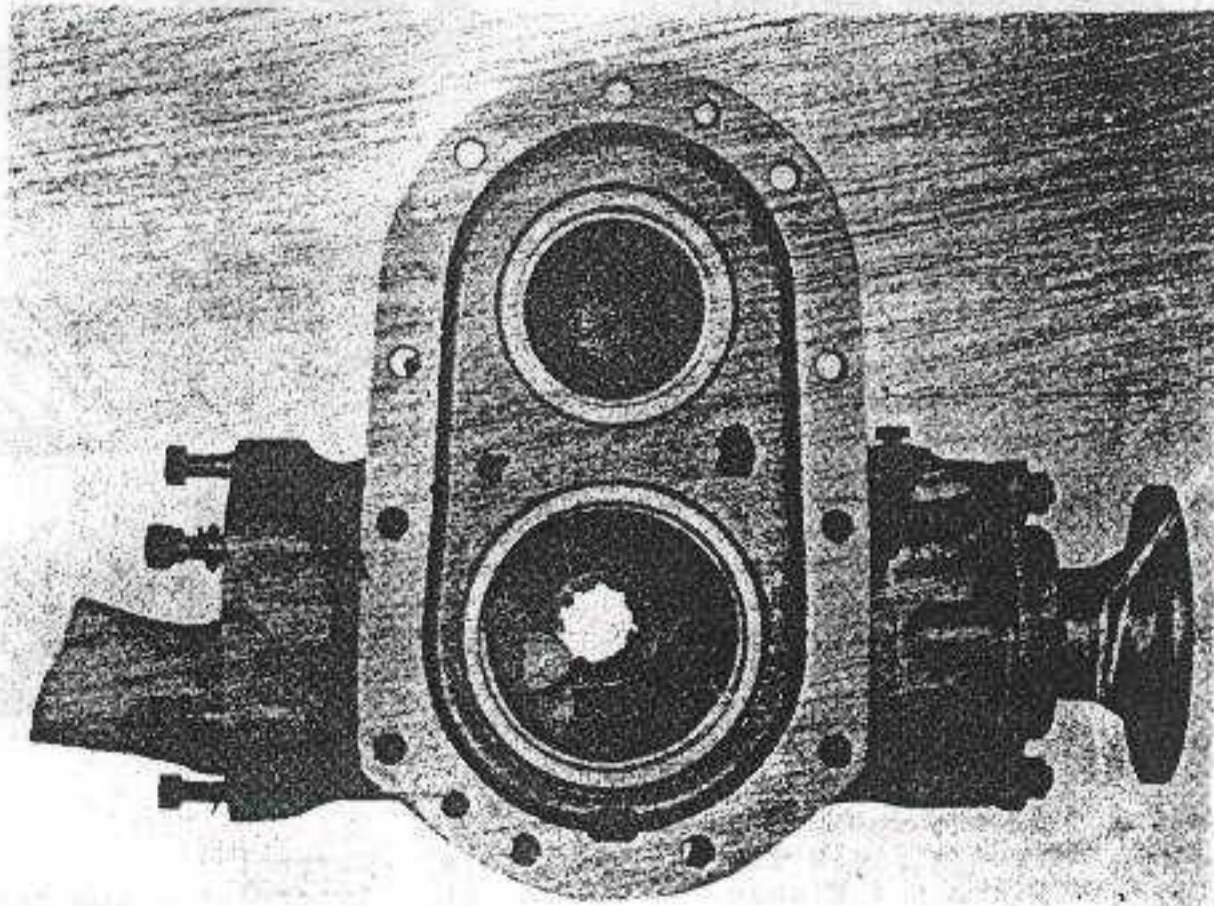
TRANSFER BOX - METHOD OF MEASURING BACKLASH IN THE BEVEL BOX GEARS
